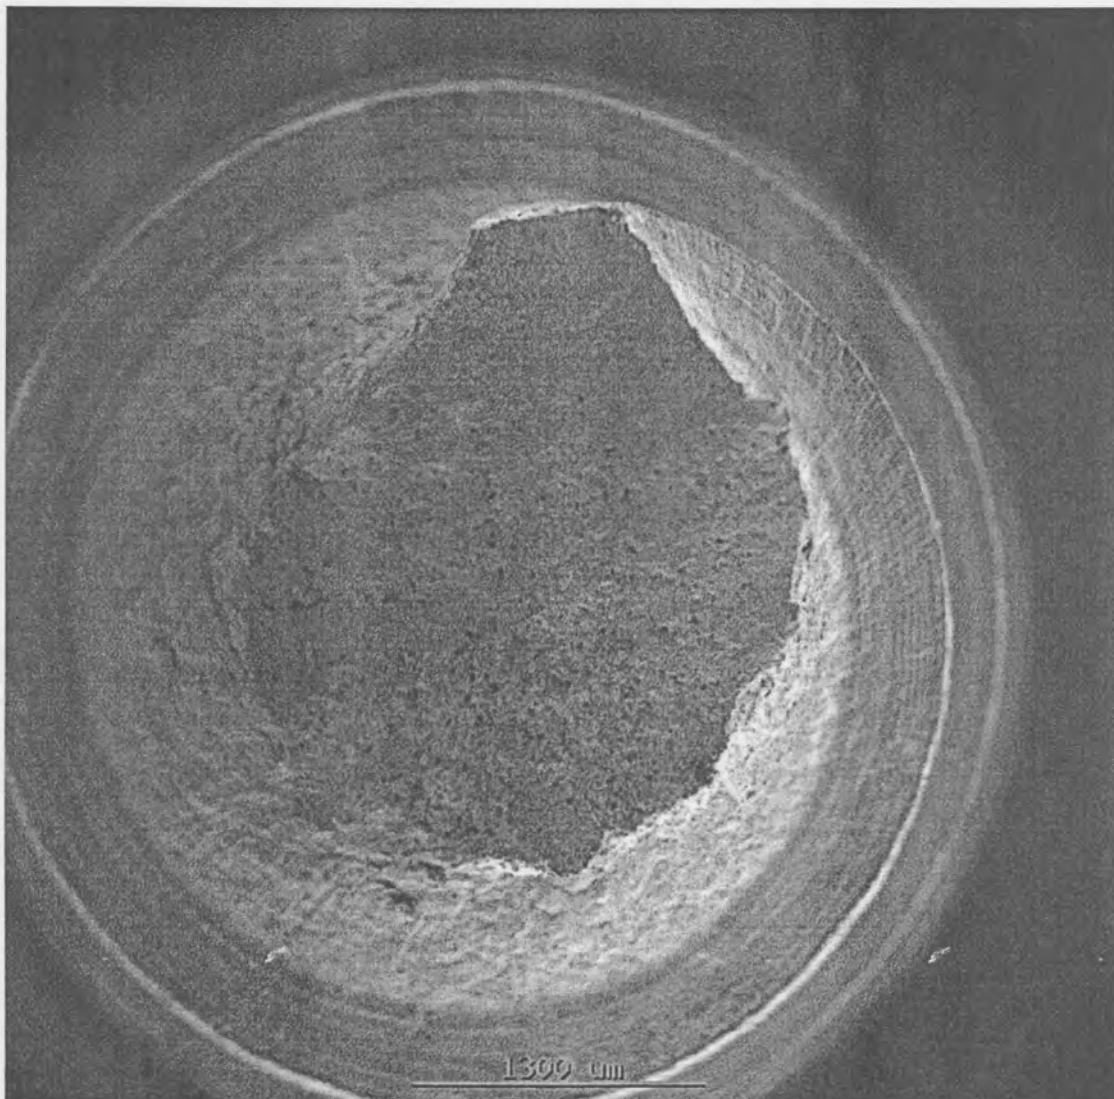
X20 New Material – Ductile fracture surface, 254 MPa
